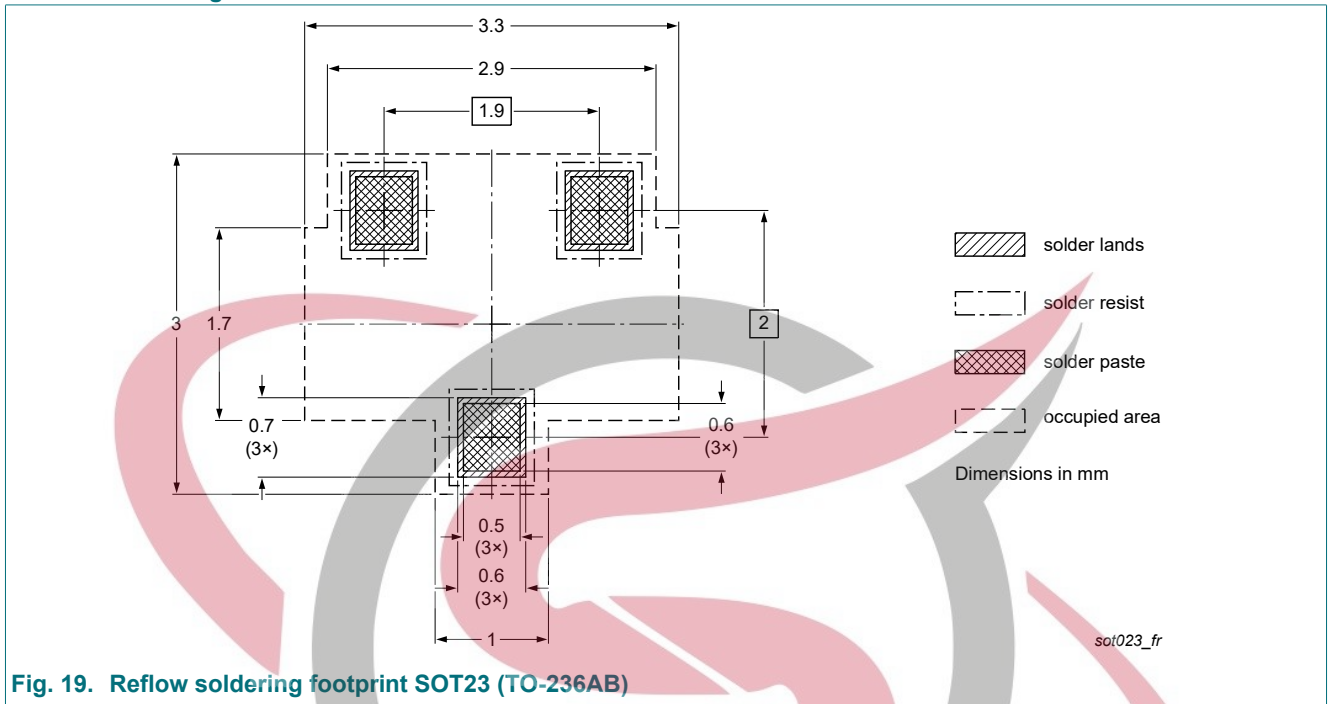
Reflow soldering footprint SOT23 (TO-236AB)
